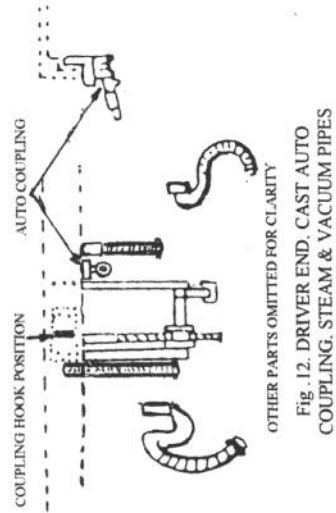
DRIVER END, CAST AUTO COUPLING, STEAM & VACUUM PIPES
